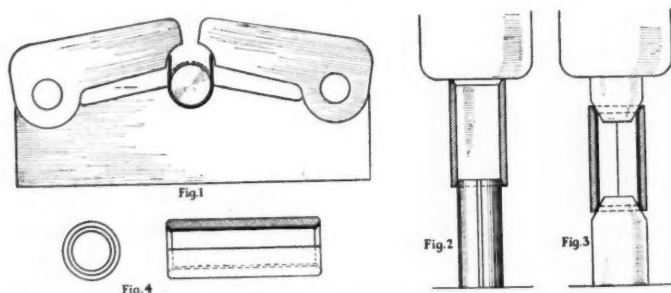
Hinged portions of die. 2—Pressing liner into steel sleeve. 3—Locking sleeve to liner by expanding ends of liner. 4—Chamfering edges for end facing
